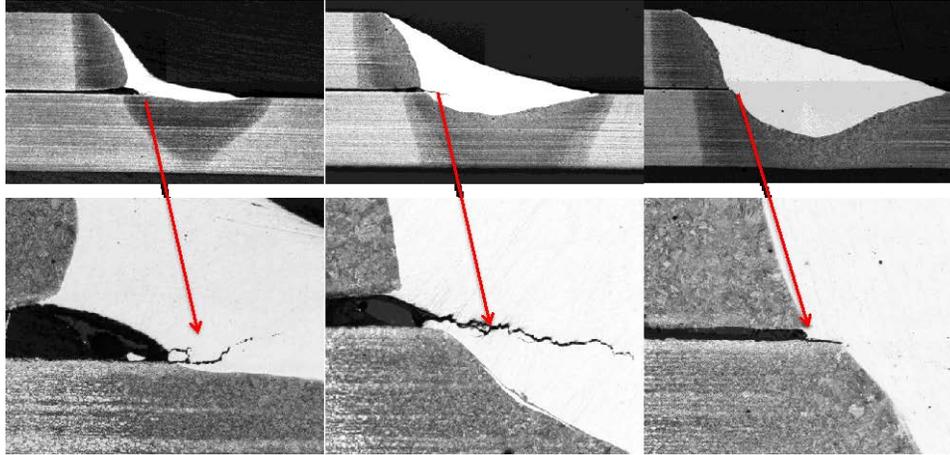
Weld solidification cracks at the weld stop in Special Wire B. Such cracks lead to the reduced weld fatigue lives.
